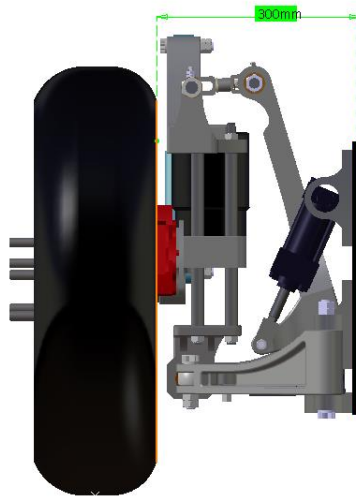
Side view of the corner module. All the mechanisms are packages within 30 centimeter of the wheel as required.
